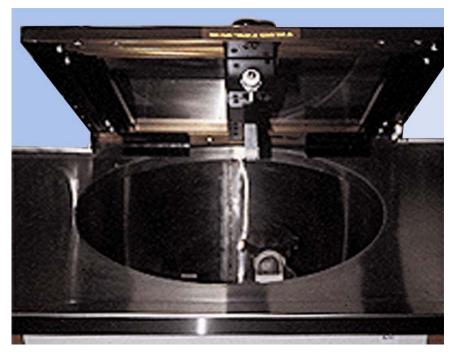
Broken-Arm Casting Machine With Safety Lid.
